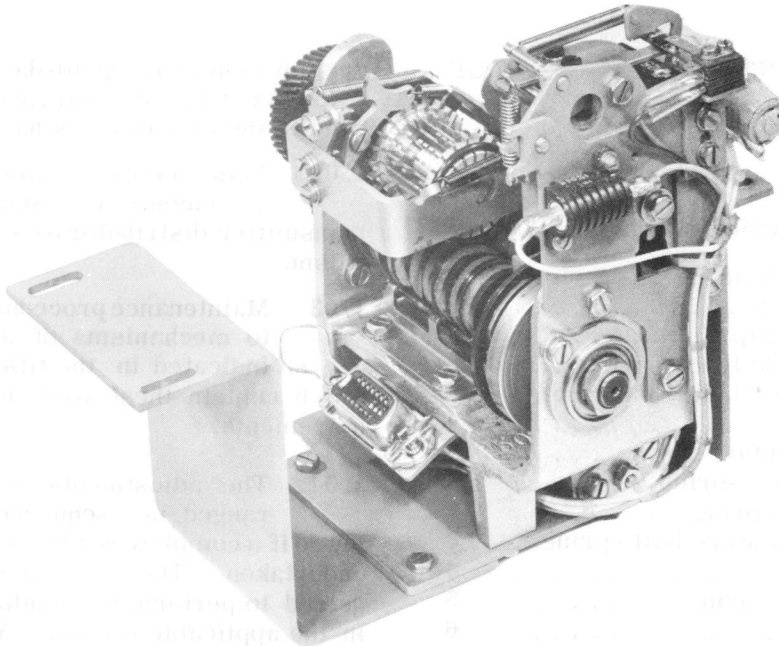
28 Transmitter-Distributor Base Answer-Back Mechanism (Front View)
